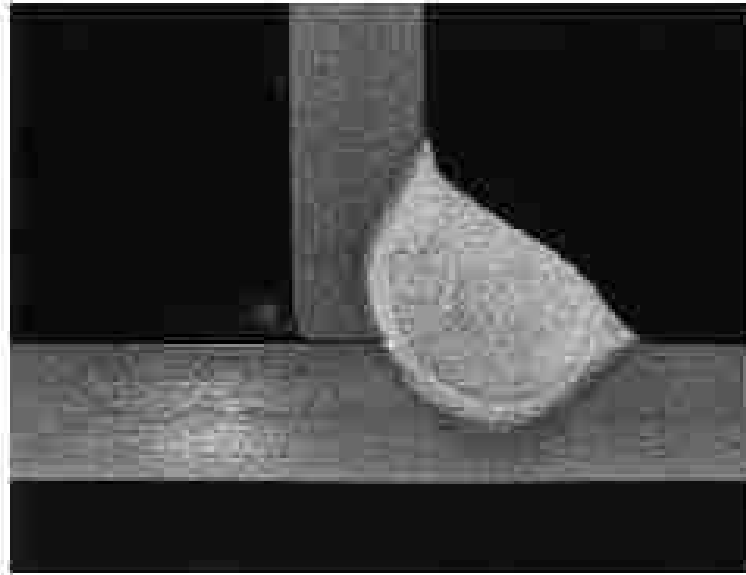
AC-TIG argon shielded, 6mm thick plate, single pass, horizontal-vertical [21].
